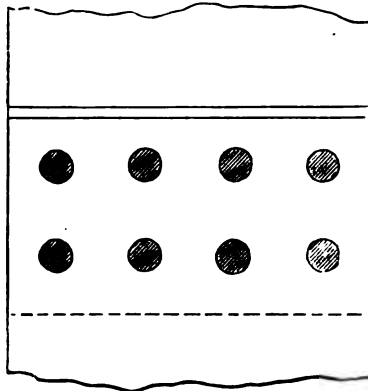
Chain-Riveted Seams. Scale  $\frac{1}{4}$  in. = 1 in.
